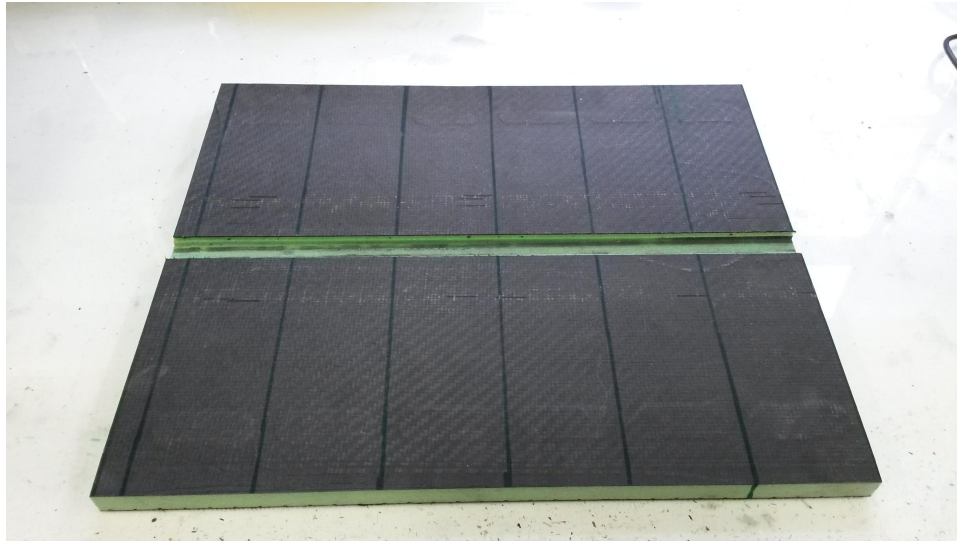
Panel trimmed to size with a groove cut down the centerline ready to be folded.
